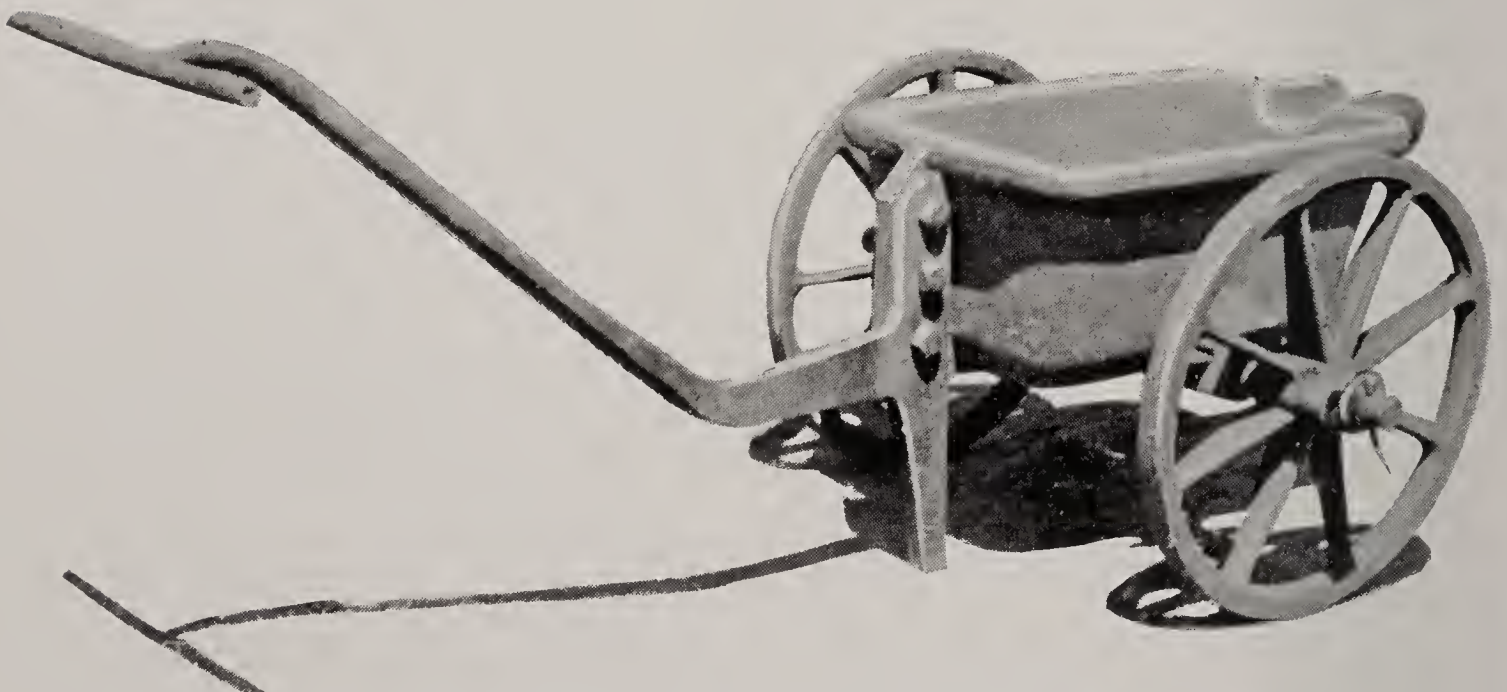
MOUNTED COPPER OR COPPER MATTE MOULD.
